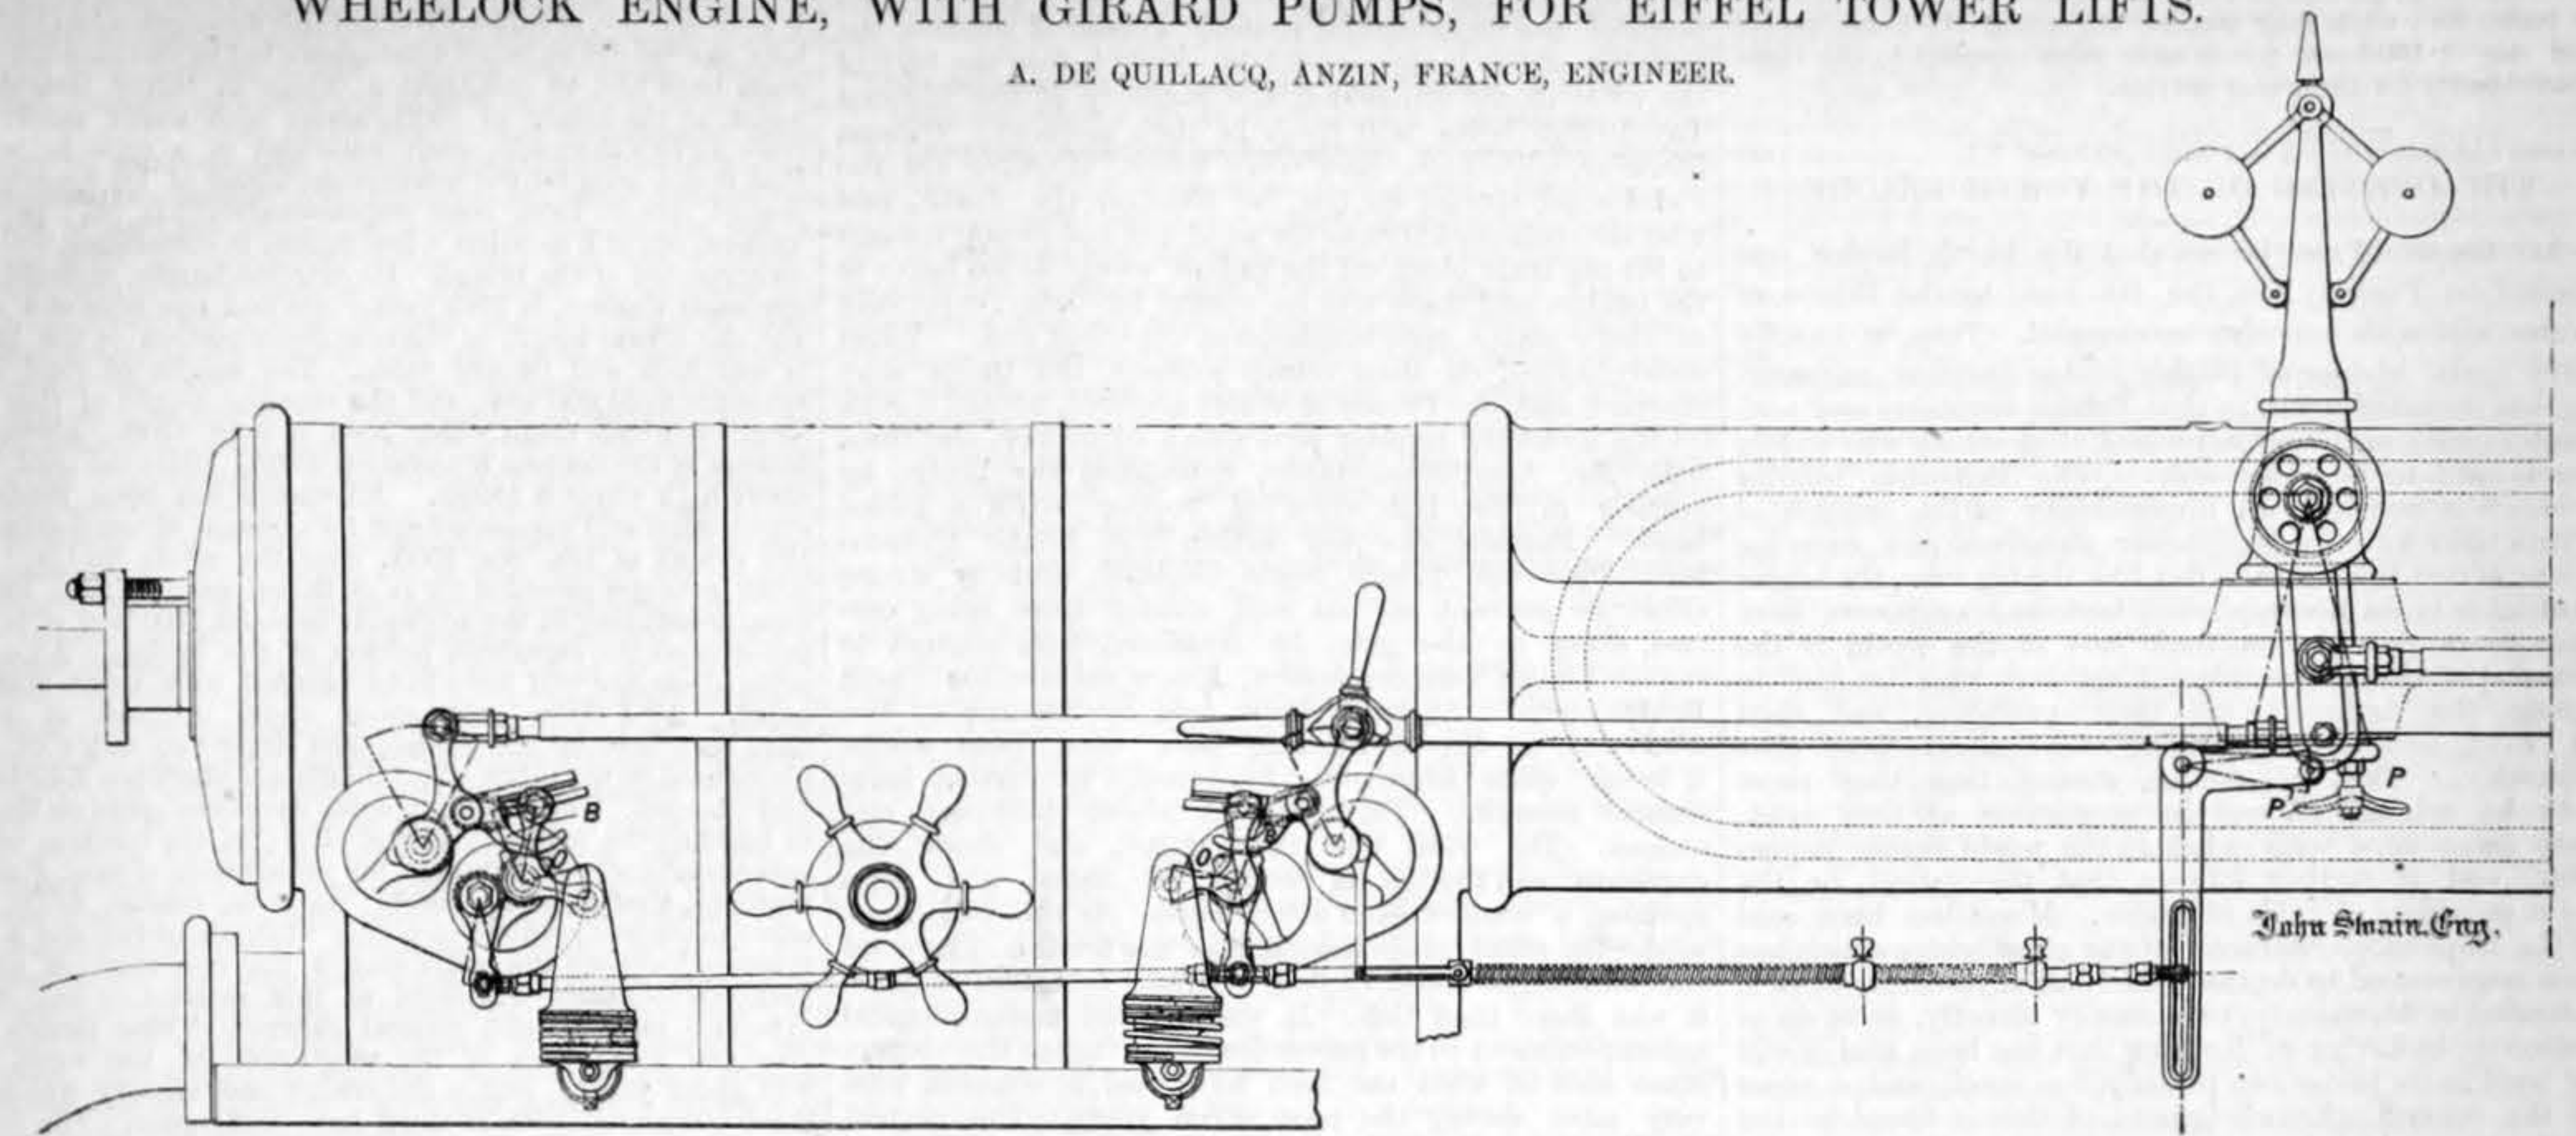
STEAM CYLINDER WITH VARIABLE EXPANSION GEAR.
